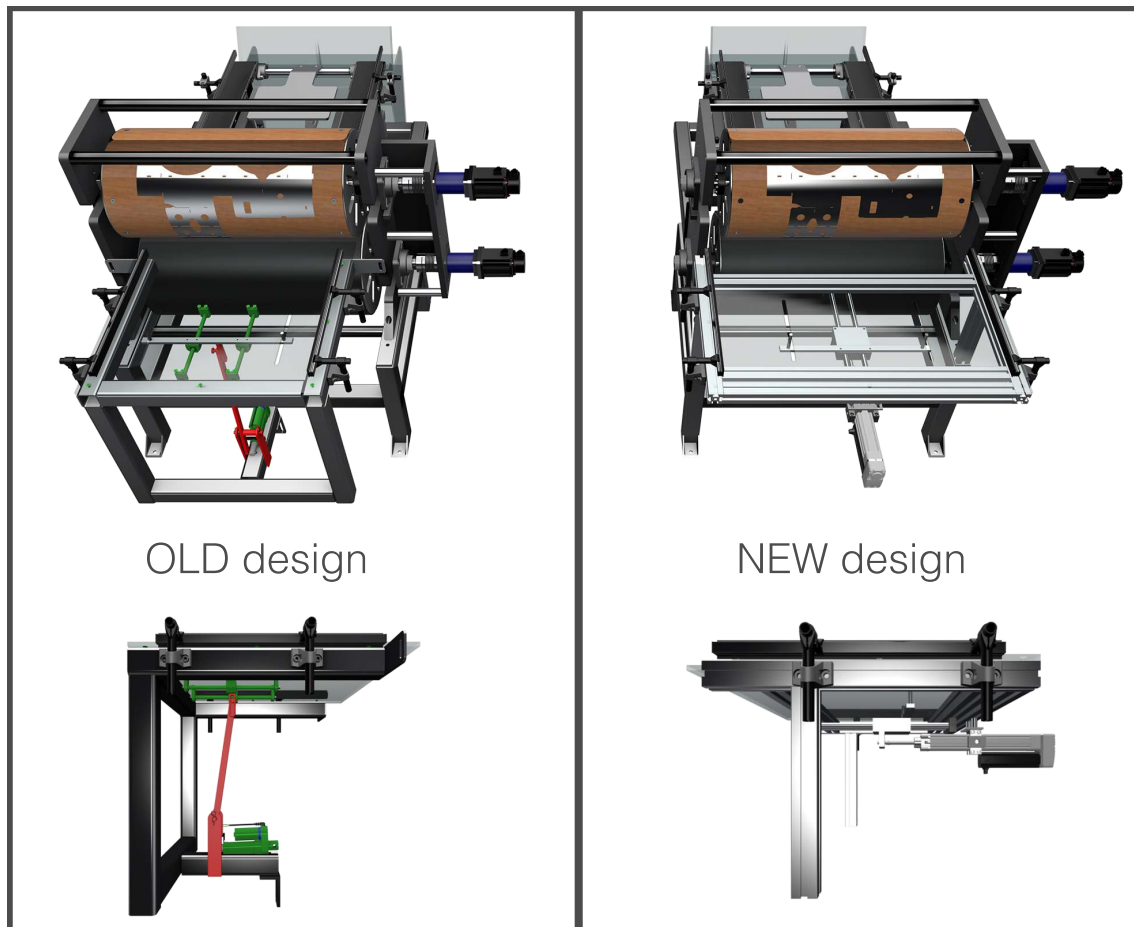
Comparison between the old and new design of the Feeding module to the roller die cutter, movable parts that have been reduced or reinforced.
